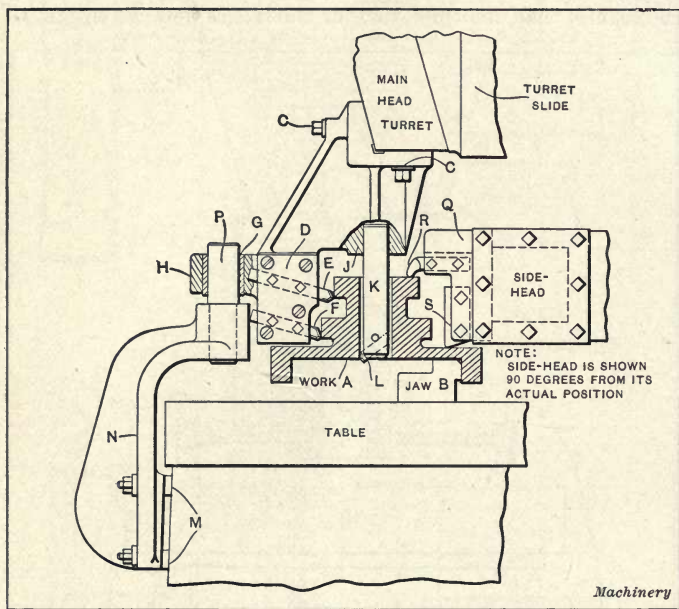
Piloted Multiple Turning Tool for Triple Gear Blank
